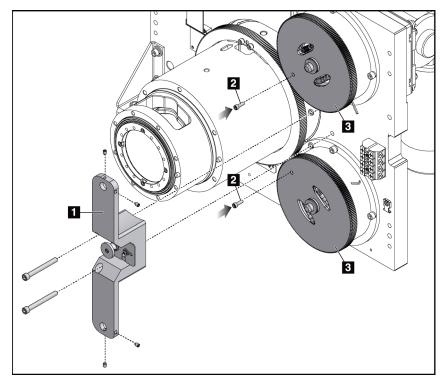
Gear Mount Bracket and Anti-Backlash Gears
